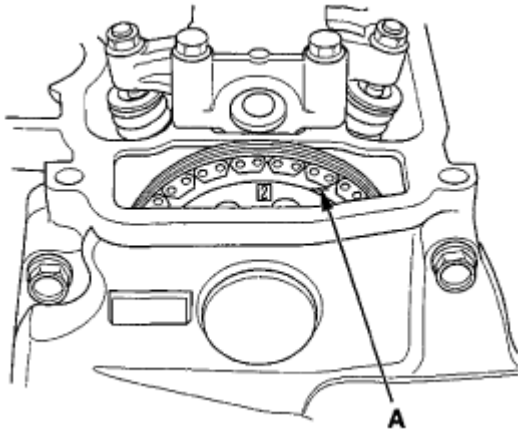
Aligning No. 2 Piston TDC Groove On Camshaft Sprocket With Top Edge Of Head
